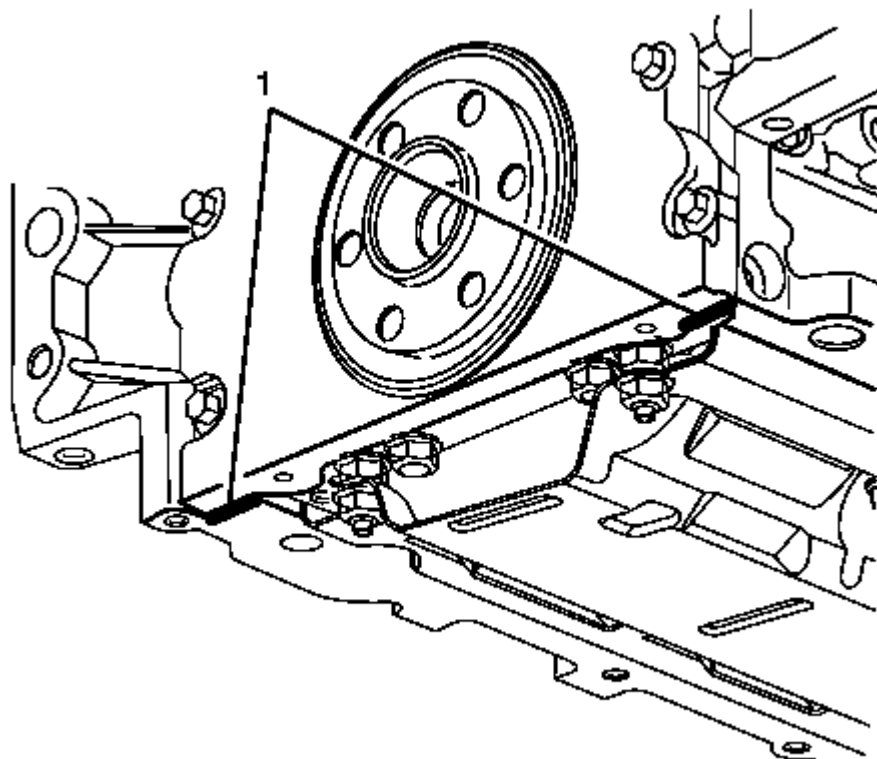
Identifying Engine Block Sealant Application Area (Rear Cover Gasket)
